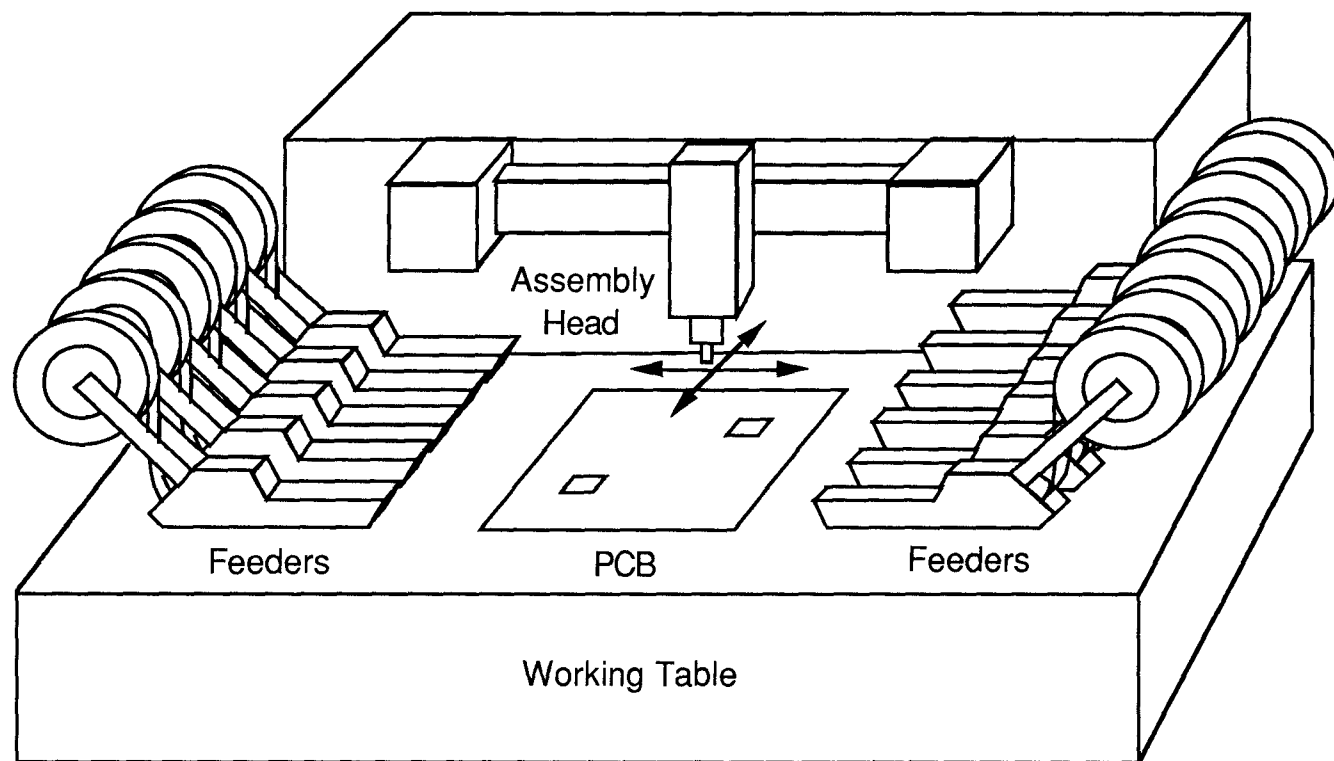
Assembly machine for type two problem. The board and feeders are fixed while the assembly head moves when performing the assembly of components.
